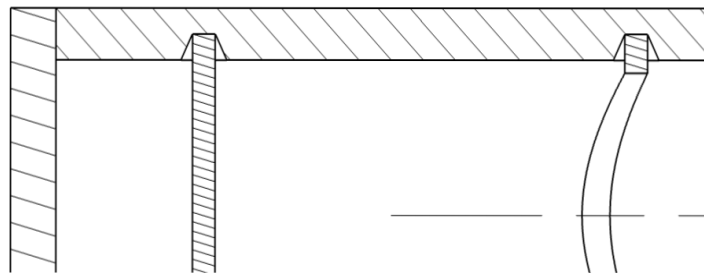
Section view of the vertical connection pipe to handler arm top plate connection
